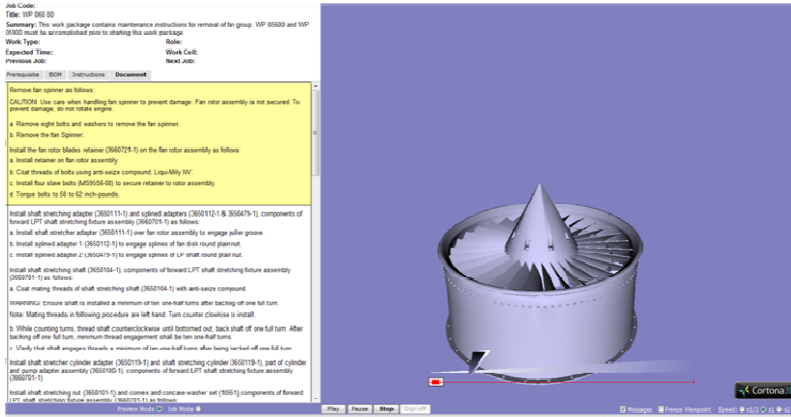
Front Fan Assembly of F-109 Engine. Comparing 3D interactive (NGRAIN), 3D static (Cortona 3D), and 2D (paper) Job Task Cards.
